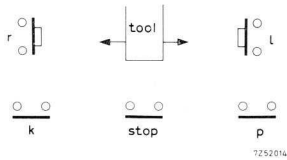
Diagrammatic representation of a machine tool and control switches.
